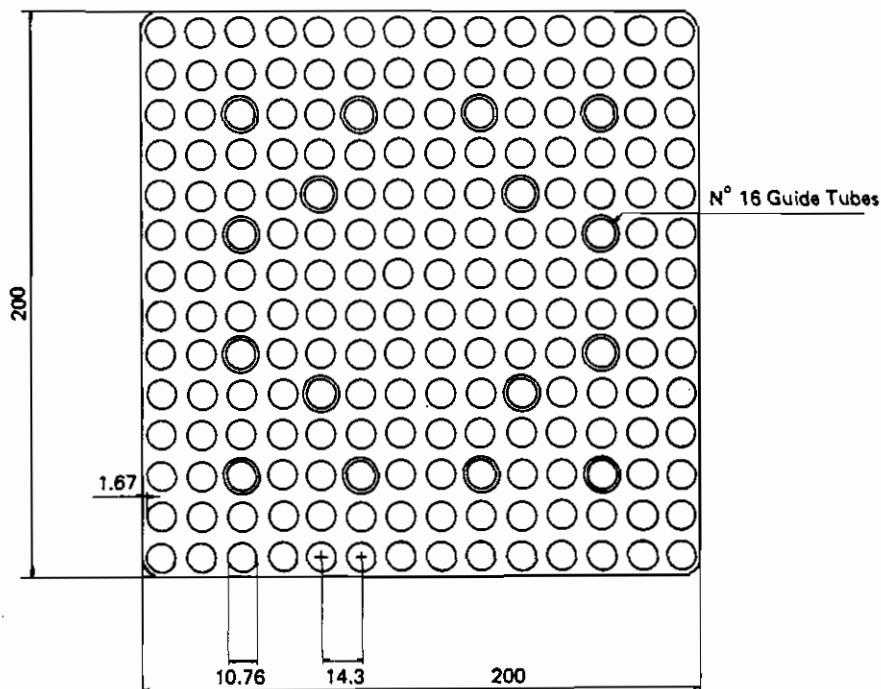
Horizontal cross section of the fuel assembly. (All dimensions are given in mm).
